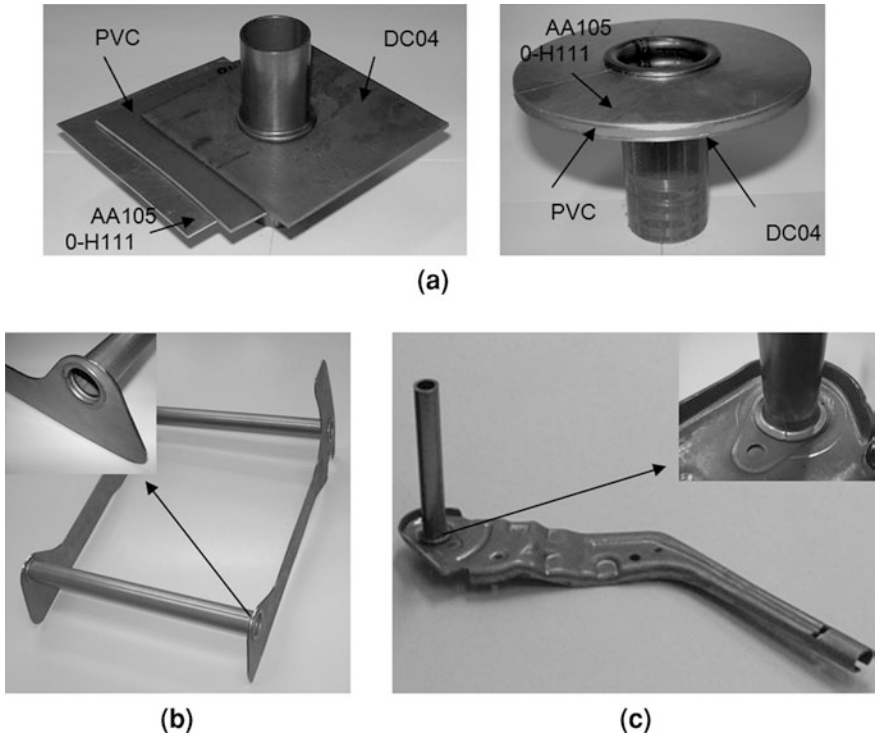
a Joining tubes to sheets of dissimilar materials, b prototype of a seat-back bottom frame of an automotive and c prototype of a hand-brake system of an automotive
